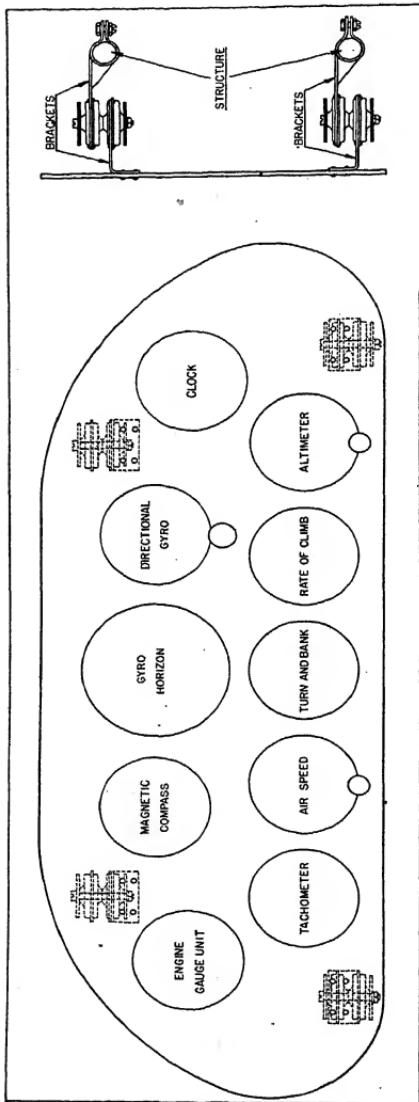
Shock-absorbing mounting of a complete instrument board.
